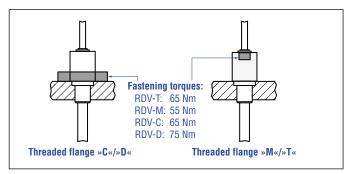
Mounting example of threaded flange »C«/»D«, »M«/»T«
